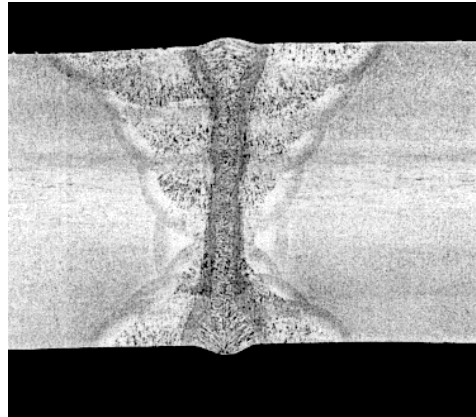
A single pass laser weld from both sides of a 25 mm thick steel plate superimposed on a multipass (11 passes) manual metal arc weld [2].
